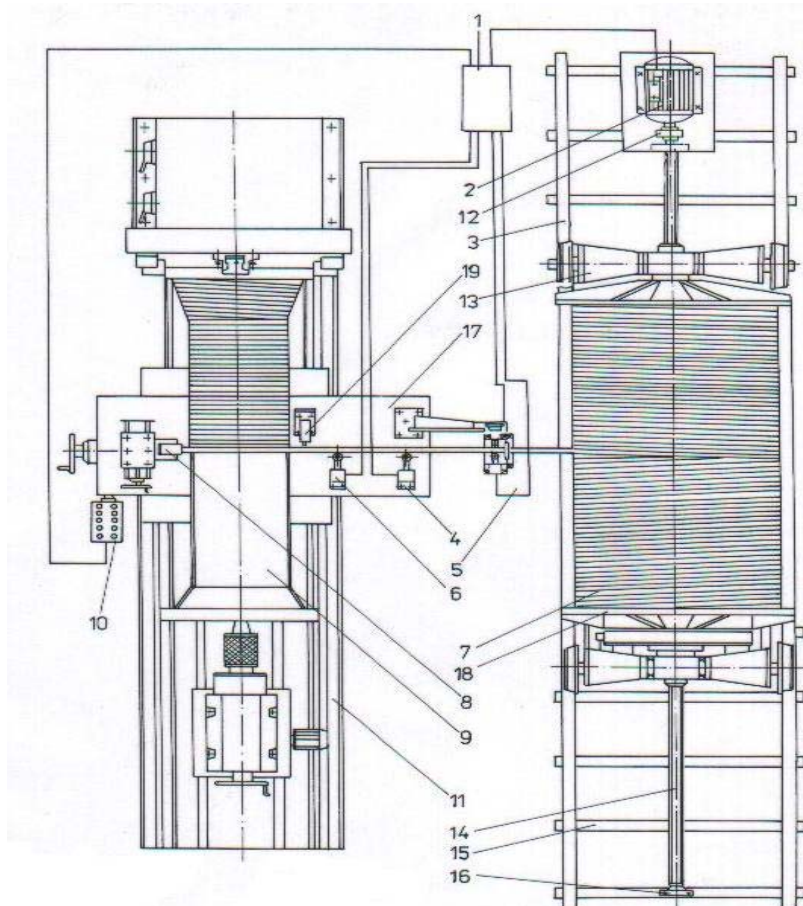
Winding equipment: 1 - switchboard, 2 - motor drive, 3 - rolling track, 4 - contact, 5 - resistive detector, 6 - contact, 7 - band, 8 - pressing roll, 9 - container, 10 - control desk, 11 - lathe, 12 - coupling, 13 - support frame, 14 - screw driver, 15 - crossbar, 16 - bearing, 17 - cross sled, 18 - support band, 19 - pyrometer
